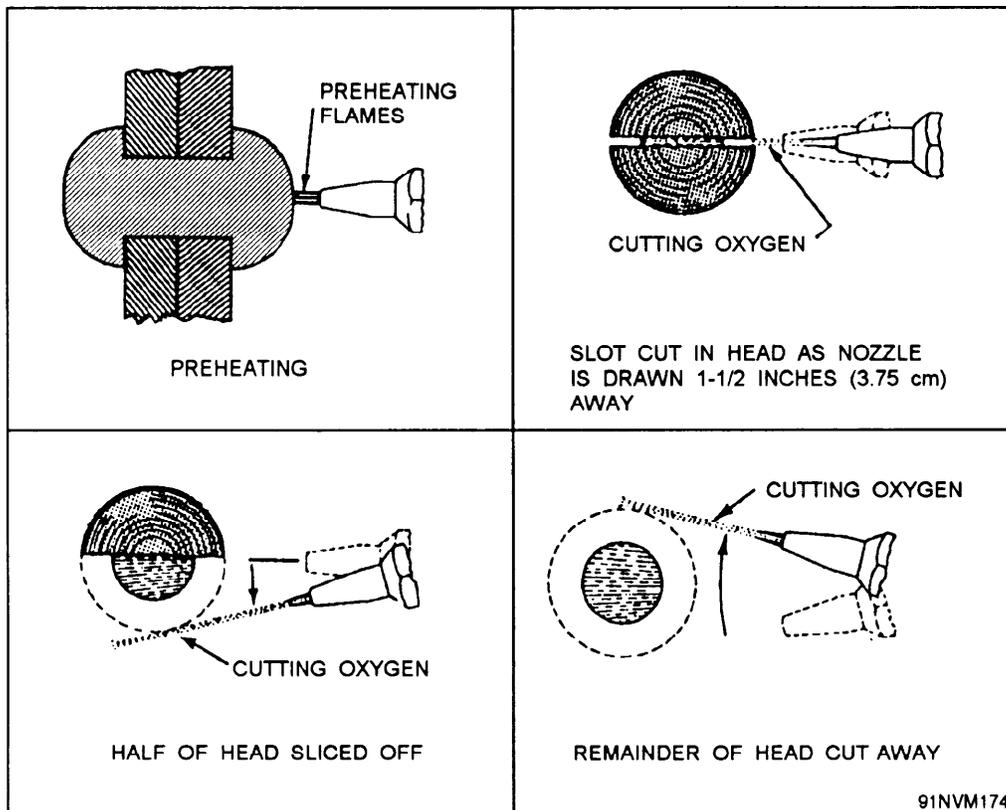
Using a cutting torch to remove the head of a rivet.
